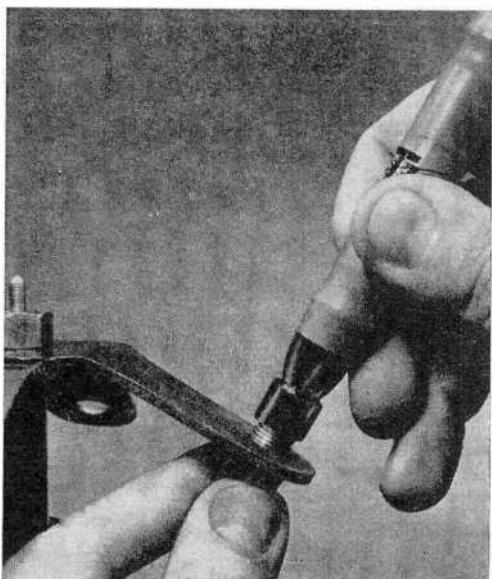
Whip elements attach to mounting bracket via predrilled holes with 1" x 3/8-24 cap screws.
